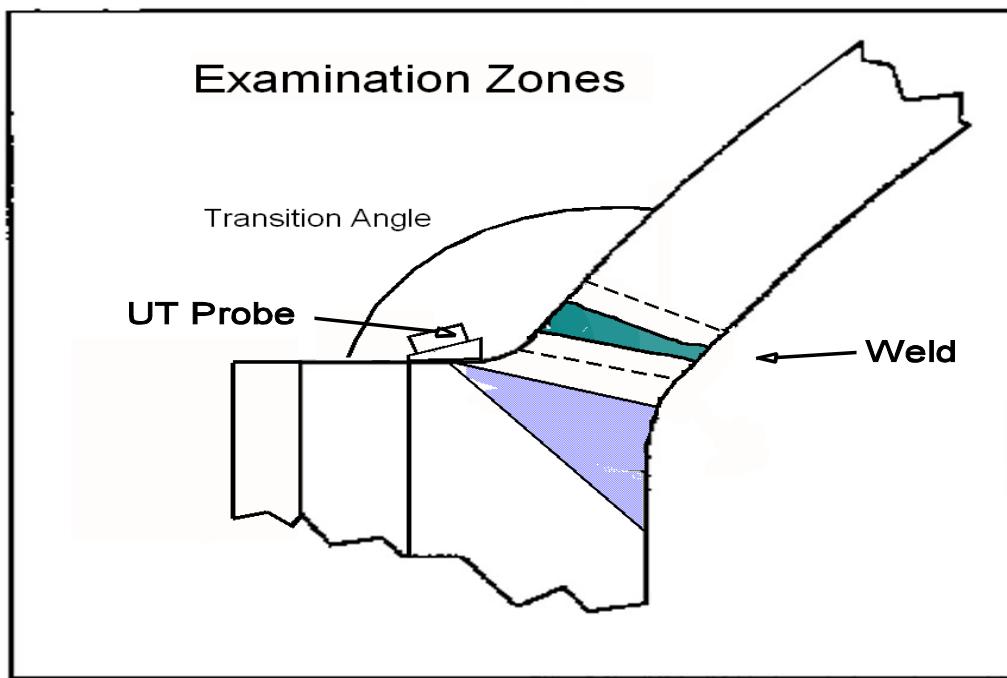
Cross-sectional view of head-to-flange weld showing the required inspection volume (within dashed lines) and UT beam. The figure illustrates that inspection from the flange side is severely limited due to transition angle and location of weld.
